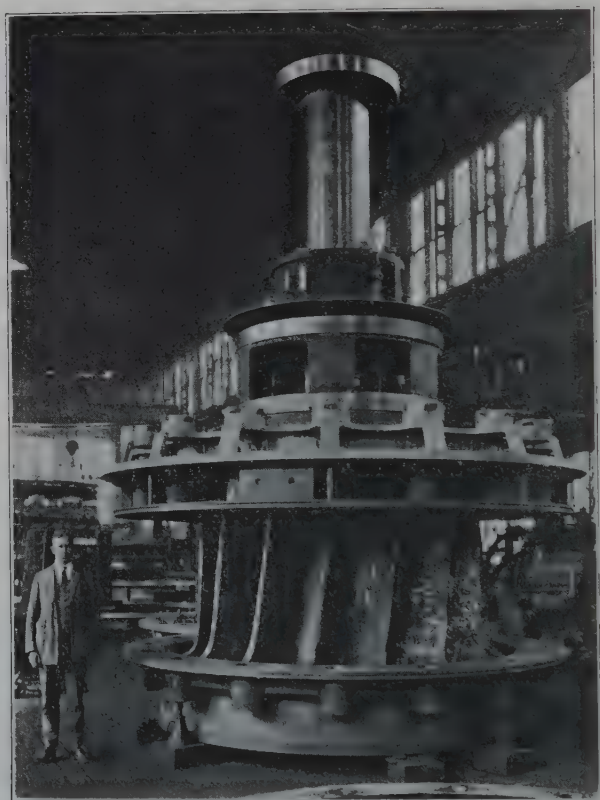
ASSEMBLY OF TURBINE RUNNER, SHAFT
